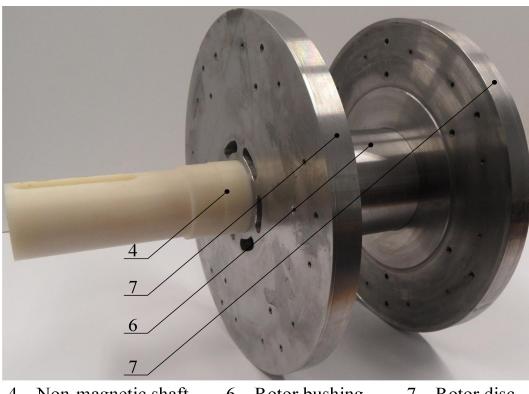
Rotor's core of the FCAFPM machine mounted on a non-magnetic shaft
